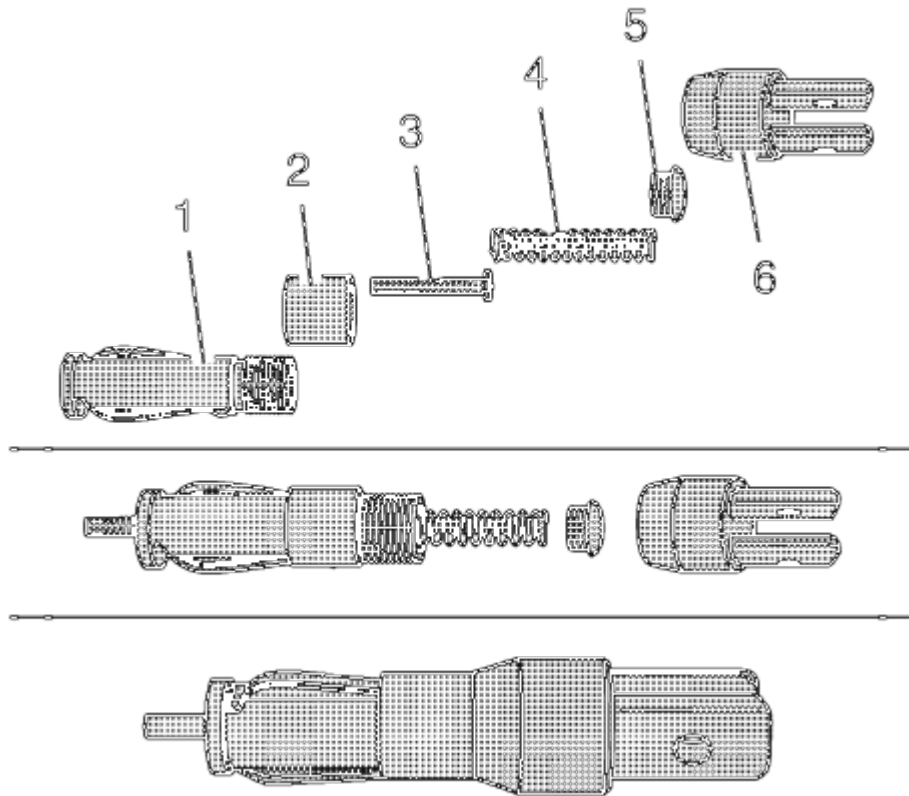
Mount, Fixing Sleeve, Thrust Piece, Spring, Screw Fixing And Lever Mount
